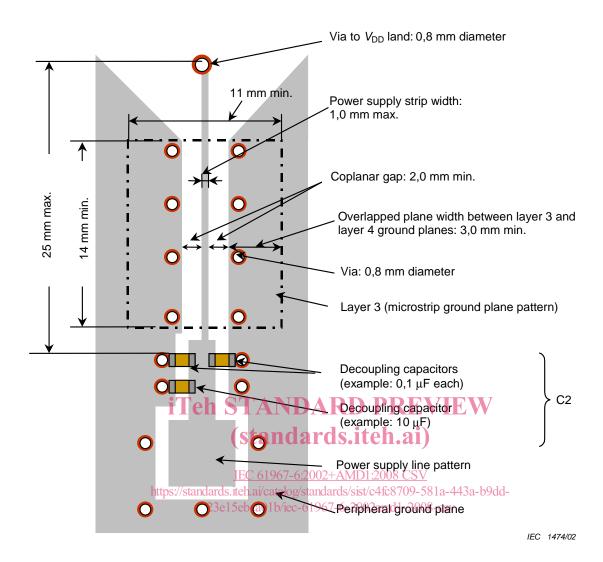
Power line pattern on the standardized IC test board - Bottom layer
